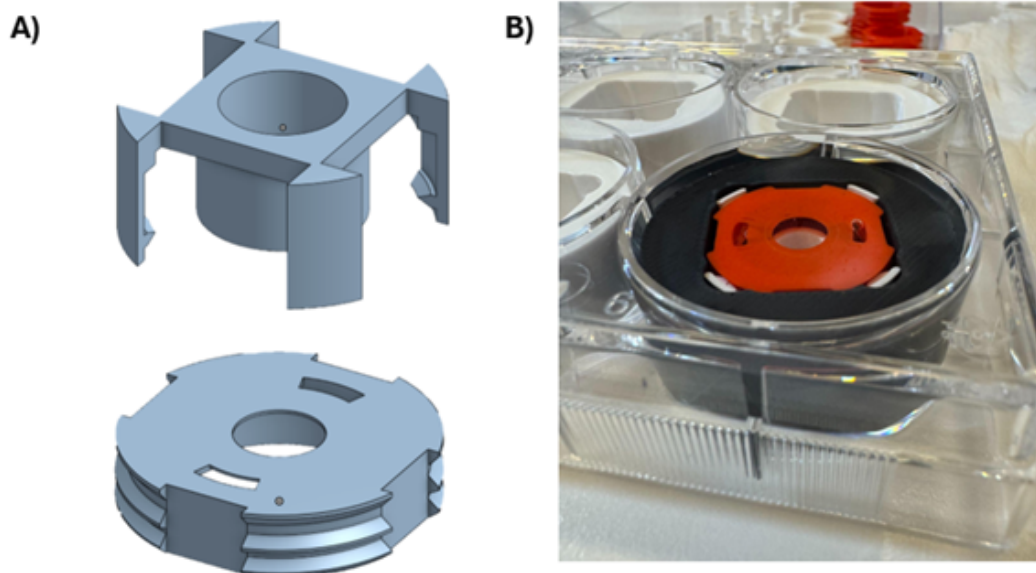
Part A illustrates the CAD design of the 3D-printed PDMS holder, while part B shows an example of the parts assembled together in a 6-well plate, along with the well insert. The red piece corresponds to the cap, the small white rectangles match the legs locking around the holder, and the black ring fills the well to minimize cell medium required.
